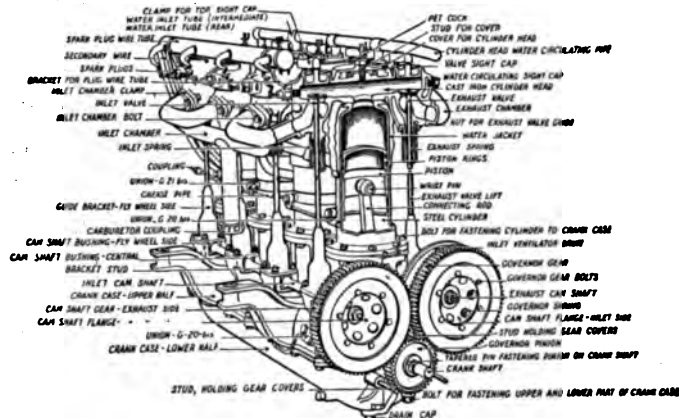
PANHARD FOUR-CYLINDER MOTOR.
